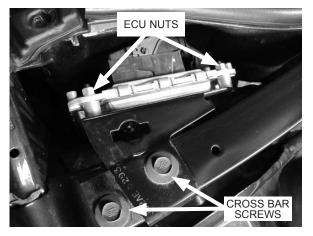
e: Remove ECU nuts and remove cross bar screws
